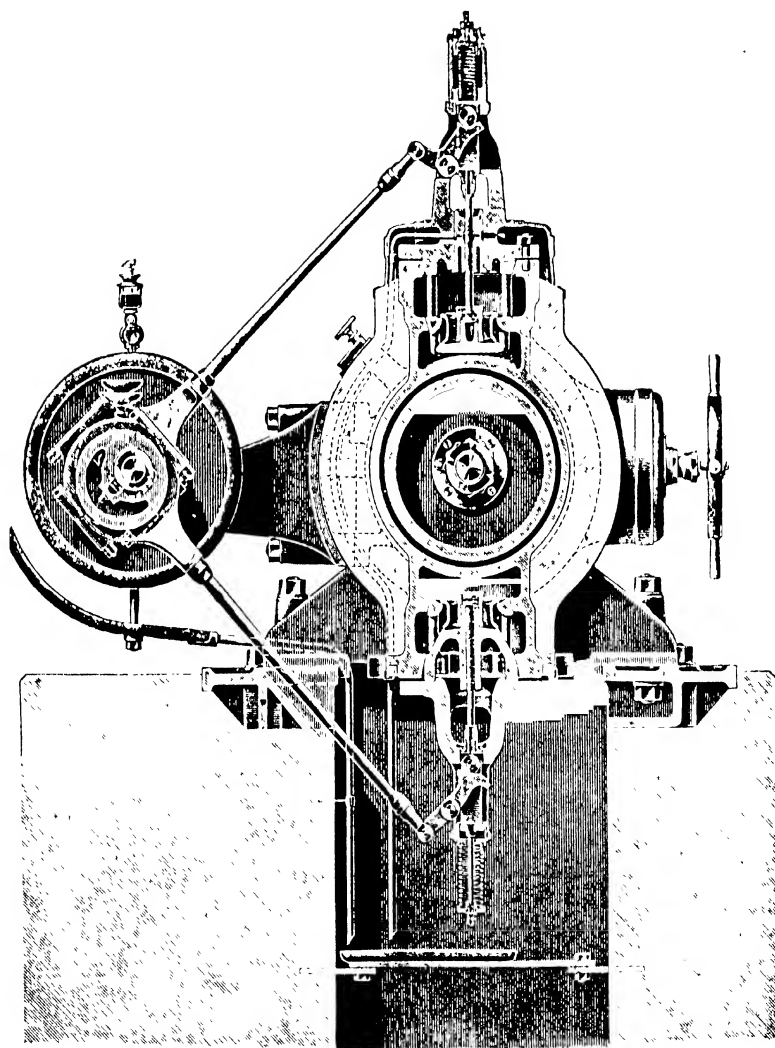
Section of a steam cylinder with positive valve gear—Lentz system.
